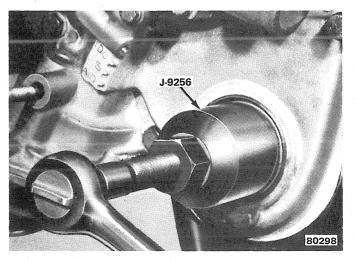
B-118 Removing Timing Case Cover Oli Seal
